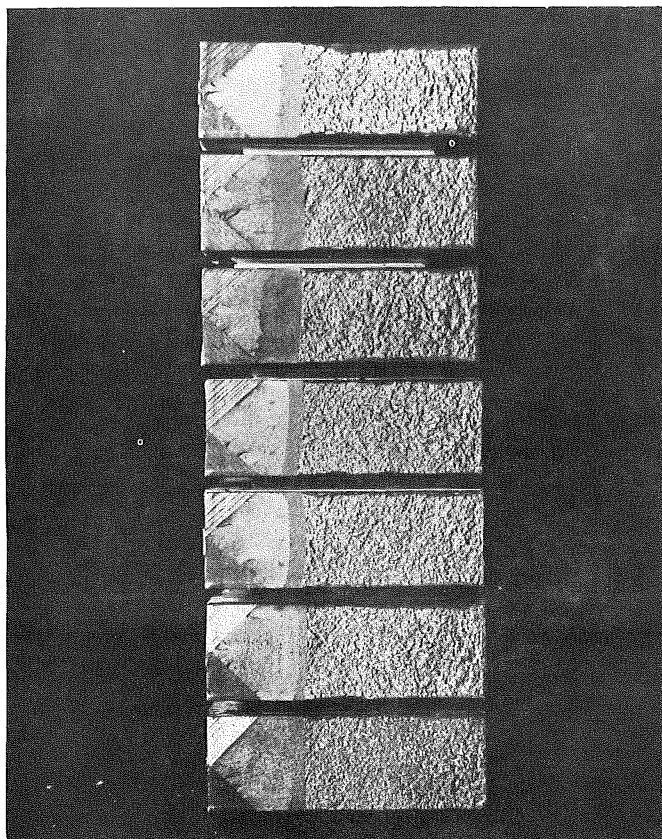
PHOTOGRAPHS OF THE FRACTURE SURFACES
